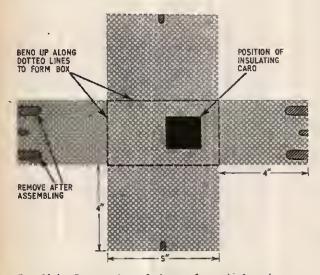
Preparation of the perforated zinc sheet to make a cover. The sides can be bent up, and card corners stuck on. This is strong and easier to carry out than soldering the perforated zinc
